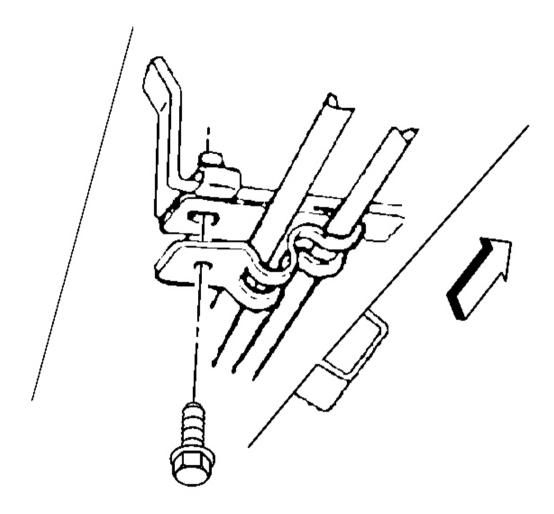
TOC Rear Pipe Front, Rear Clamp & Bolts Courtesy of GENERAL MOTORS CORP.
